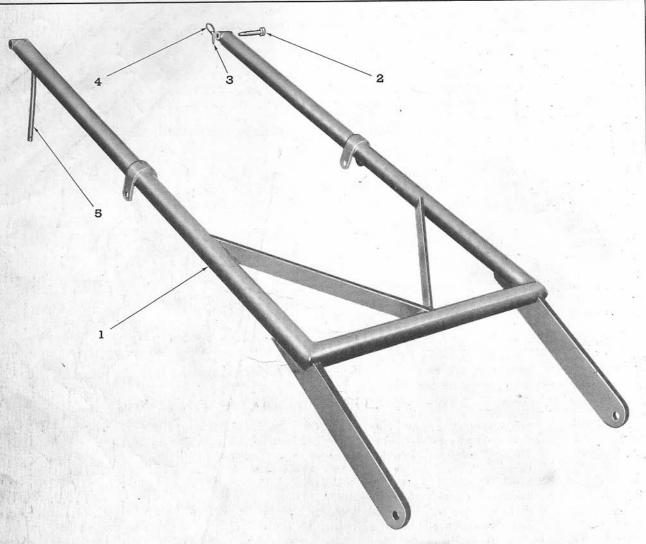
Loading Arm Assembly for Model 19-7 (Prior)
